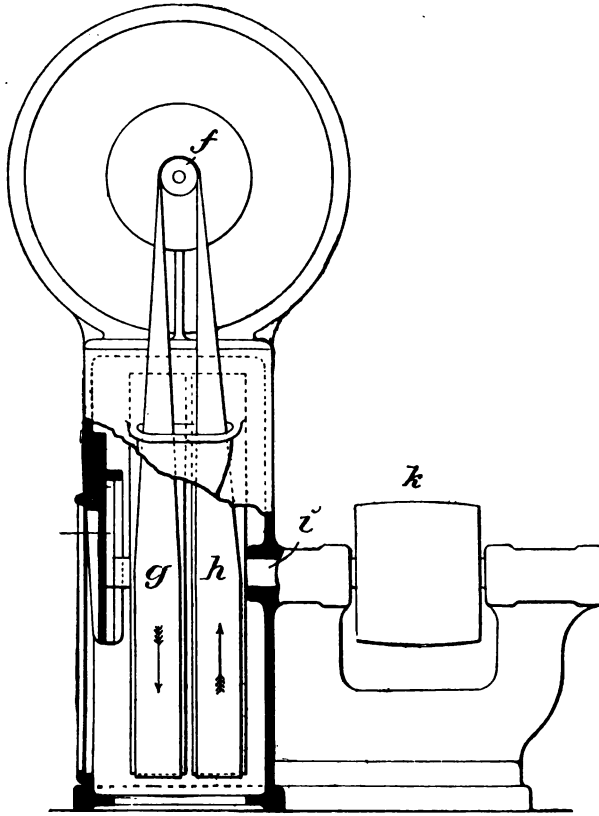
Seger Steam Turbine showing Belt-driving Arrangement.
